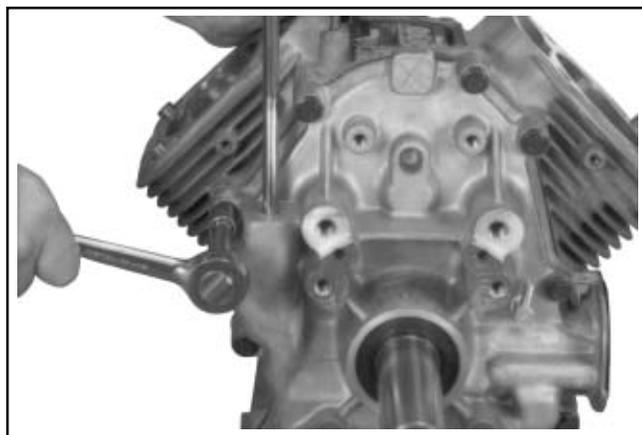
Removing the Ten Closure Plate Fasteners.
